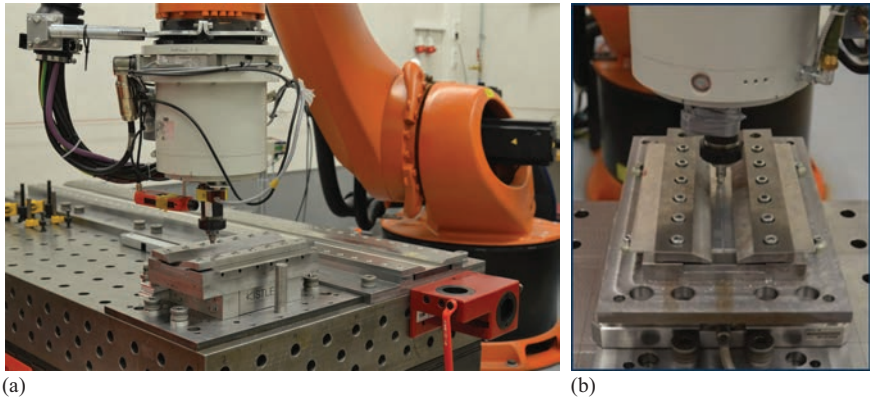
(a) Robot-based FSW of aluminum specimen in the production engineering lab. (b) FSW on Al-specimen
